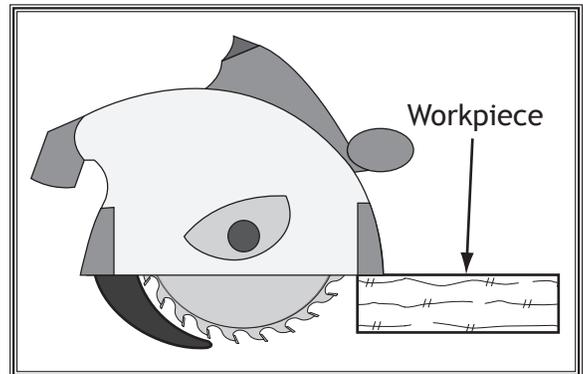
Positioning the saw onto the workpiece for a straight cut.
